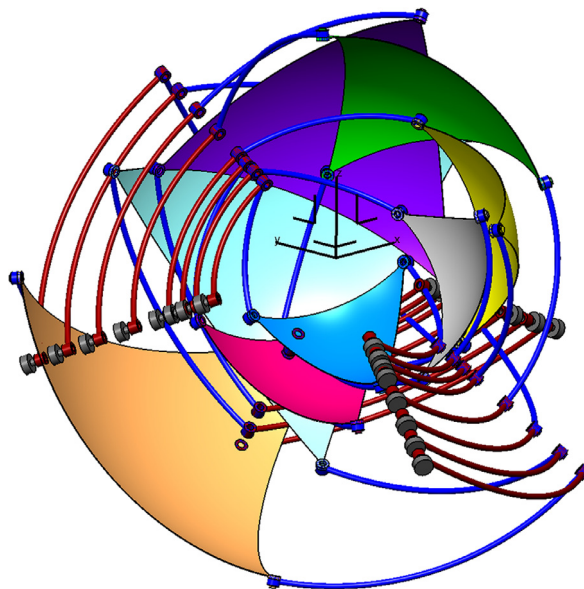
2nd view of the 8 assembly modes of Robot-2.
